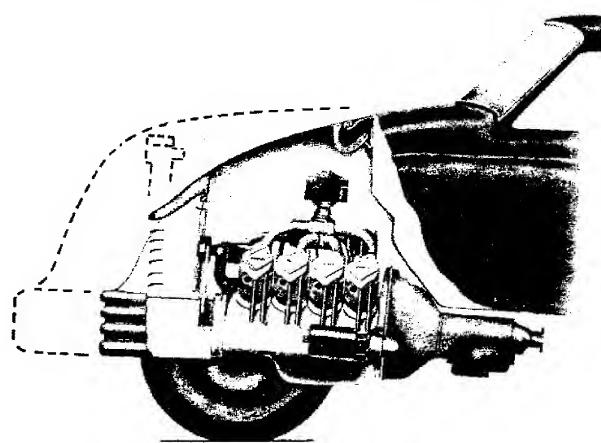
FRONT ENGINE PASSENGER CAR V8 CYLINDER ENGINE 100 HP - 3800 RPM 300 LBS. INSTALLED WEIGHT
